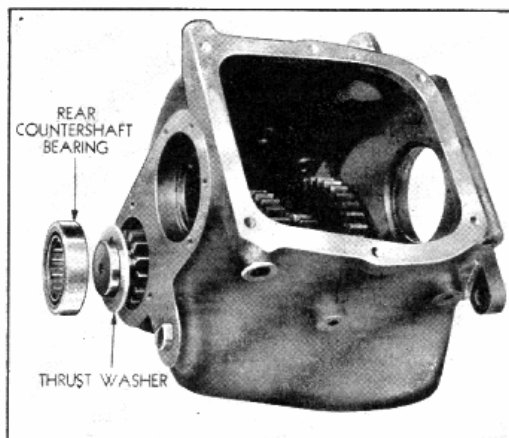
Assembling Thrust Washer and Roller Bearing on Rear End of Counter Shaft.
